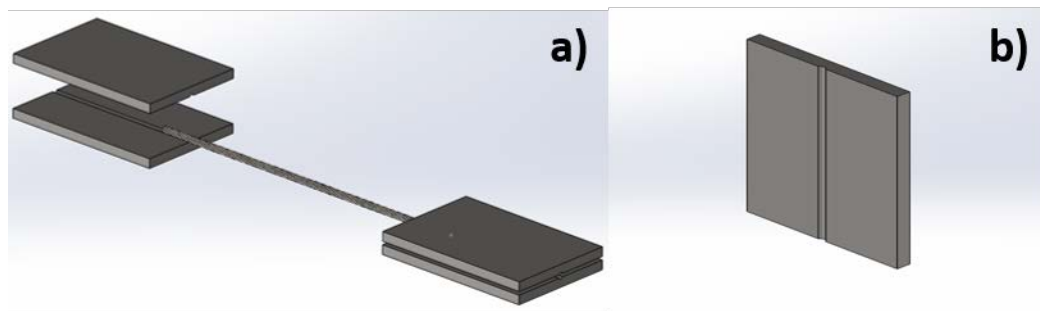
3D SolidWorks design of semi-cylindrical grooved grip inserts: (a) full assembly with a sample braided cable and (b) an example of a flat face showing a semi-cylindrical groove.
